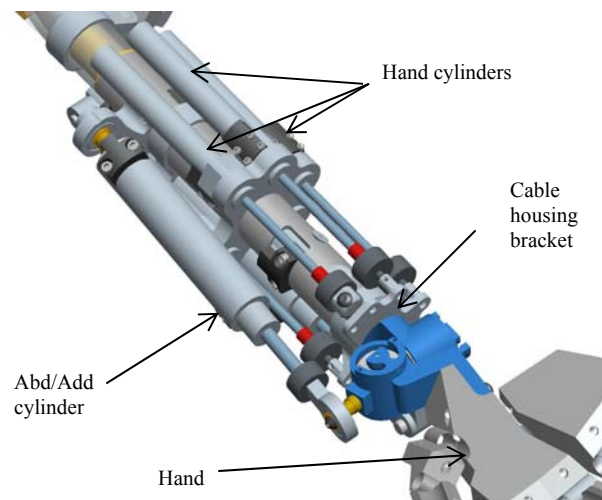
Solid model of hand cylinders mounted to the distal forearm.
